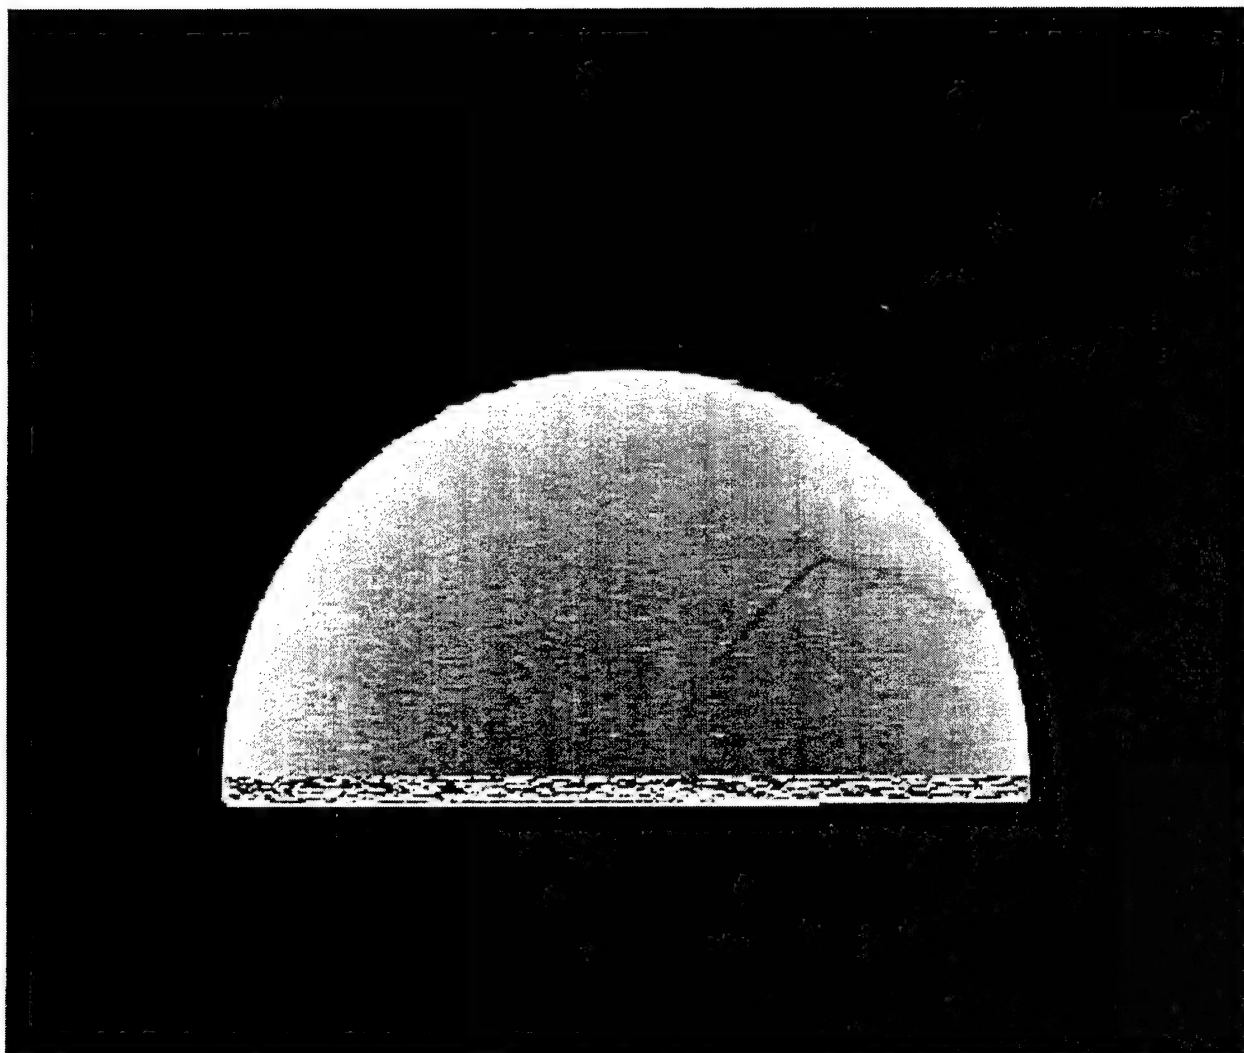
5.53 mm from bottom of disk with 65° rotation about X-axis.
